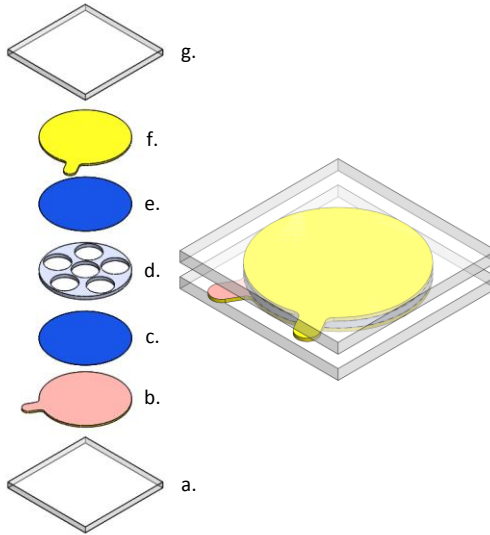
3D rendering and exploded view of SFCS:ZnO polarization molds
